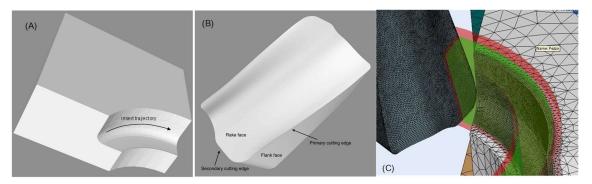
Workpiece to be machined (A) - insert geometry (B) - Developed model and meshing (C)
